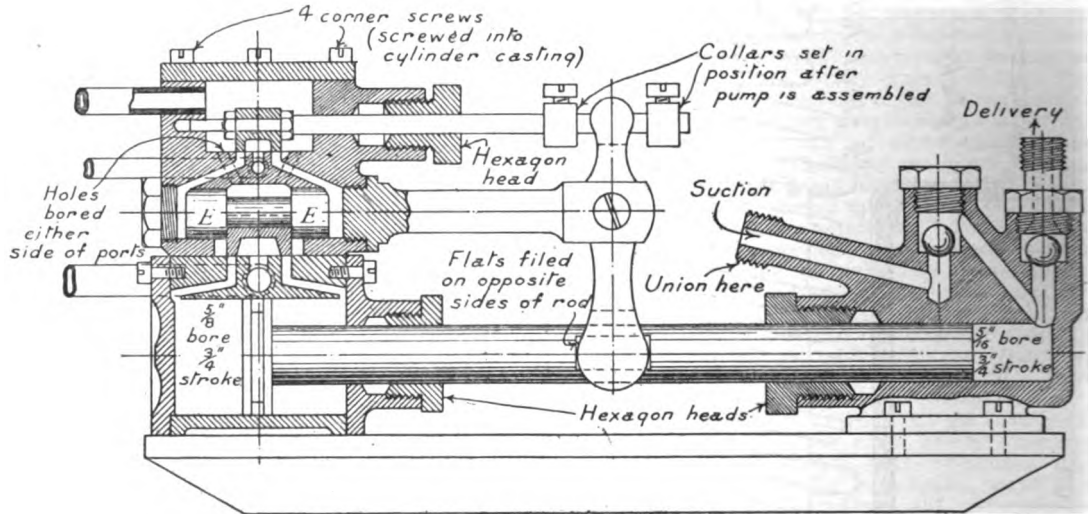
LONGITUDINAL SECTION THROUGH STEAM PUMP.
